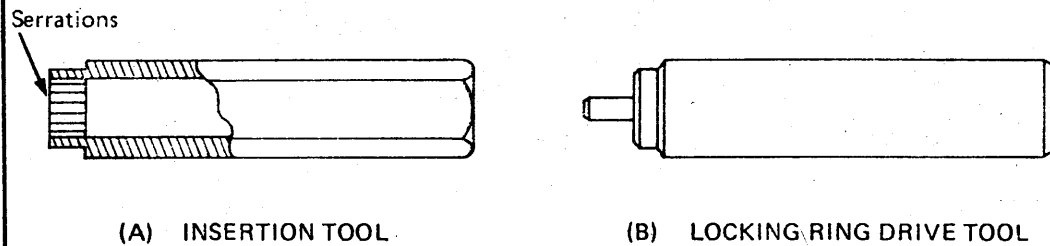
TOOLS FOR RING-LOCKED INSERTS
